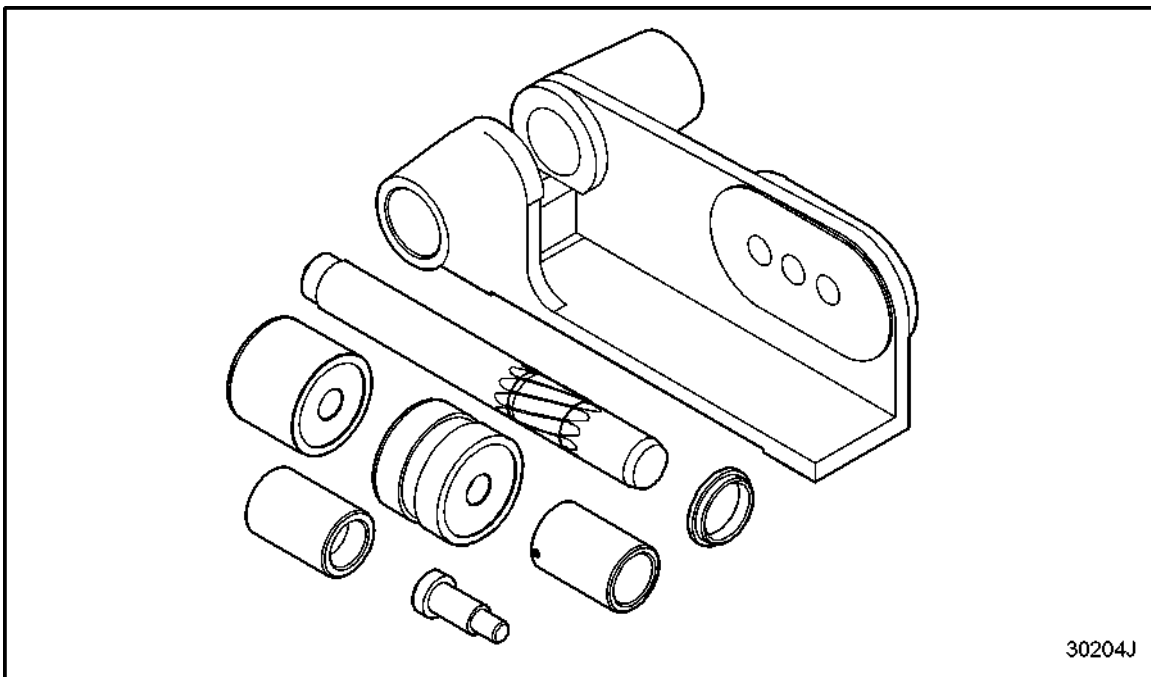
Connecting Rod Bushing Reaming Set, J 29588-53
